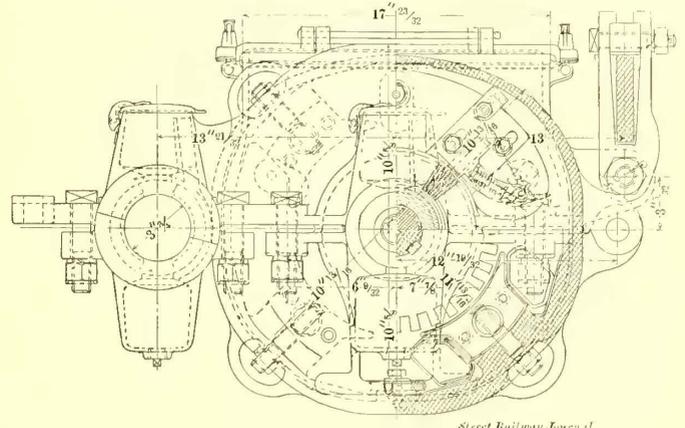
CROSS SECTION OF RAILWAY MOTOR
